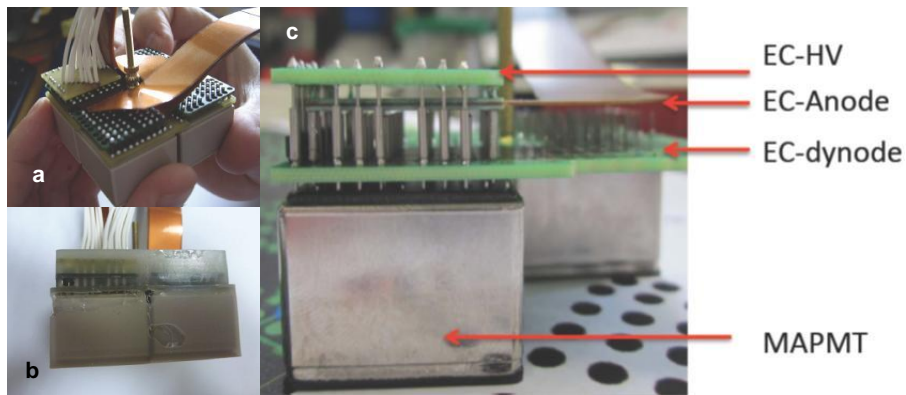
a) EC unit before potting, b) EC unit board potted and c) EC unit boards assembly [43].
